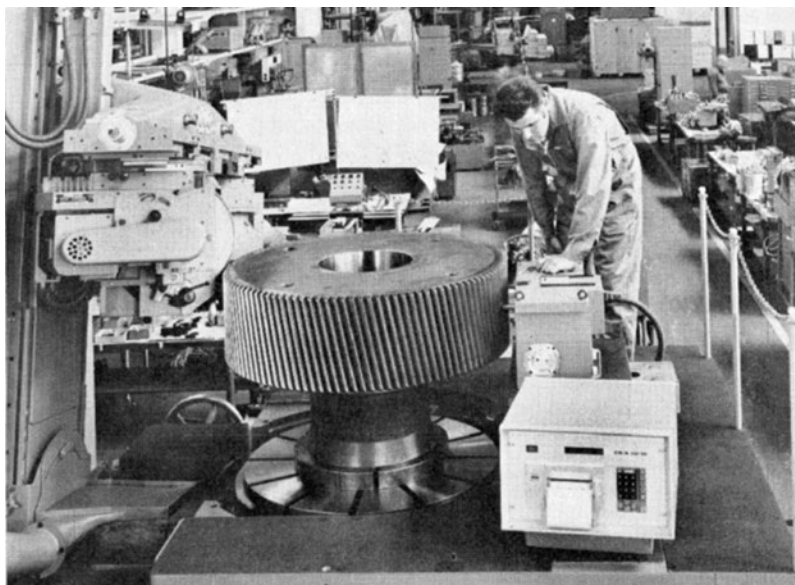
Portable profile-checking head mounted on a grinding machine. (Courtesy of Maag Gear Wheel Co., Zurich, Switzerland.)
